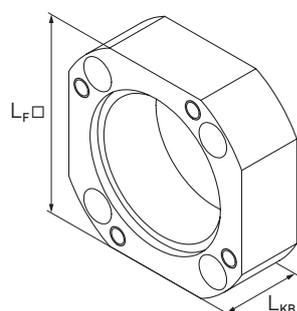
Coupling housing KB for linear modules HM-B and cantilever axes HC-B
